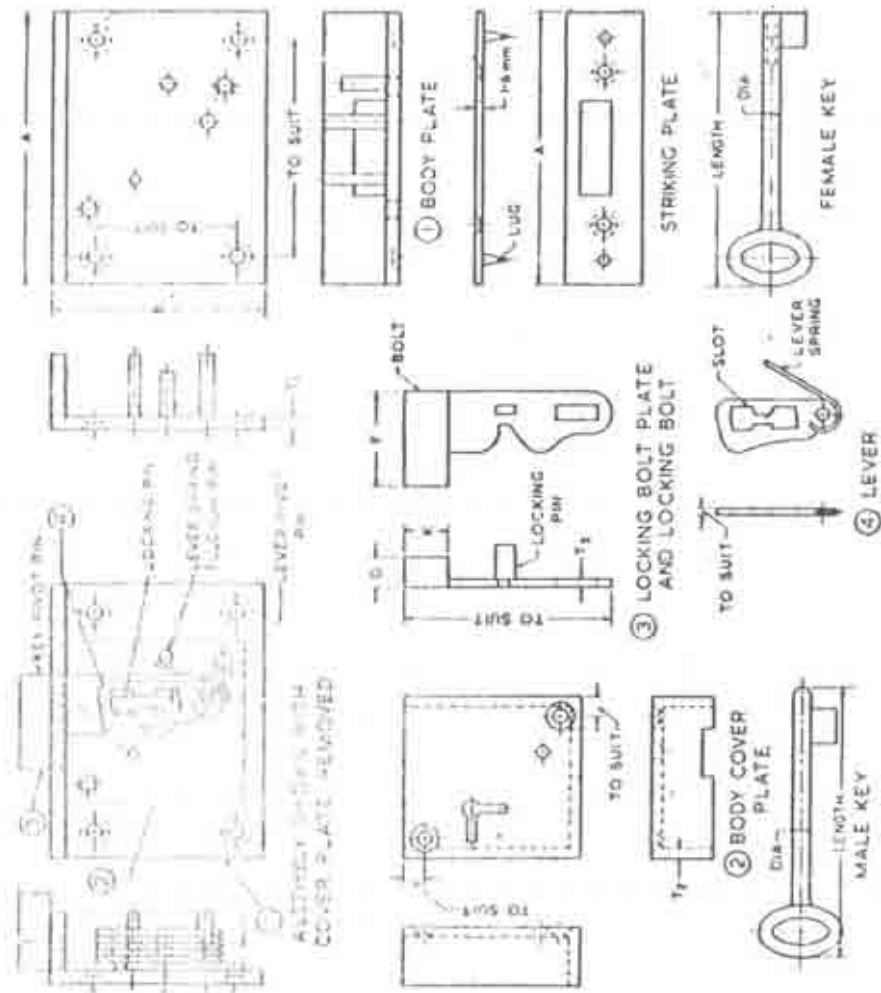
TYPICAL DESIGN OF DRAWER LOCK
